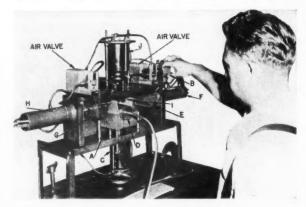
Illustration showing special application of Beck-ett Hi-Cylic Air Valves designed to increase production of aluminum elliptical shaped shells.
